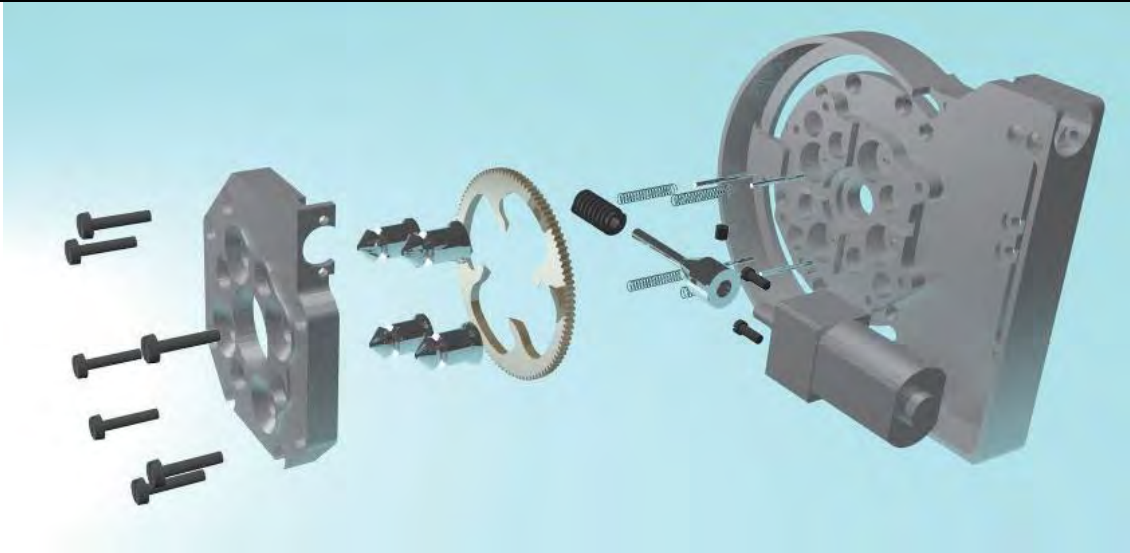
A CAD model of the components of a CoBoLD docking unit [26].
